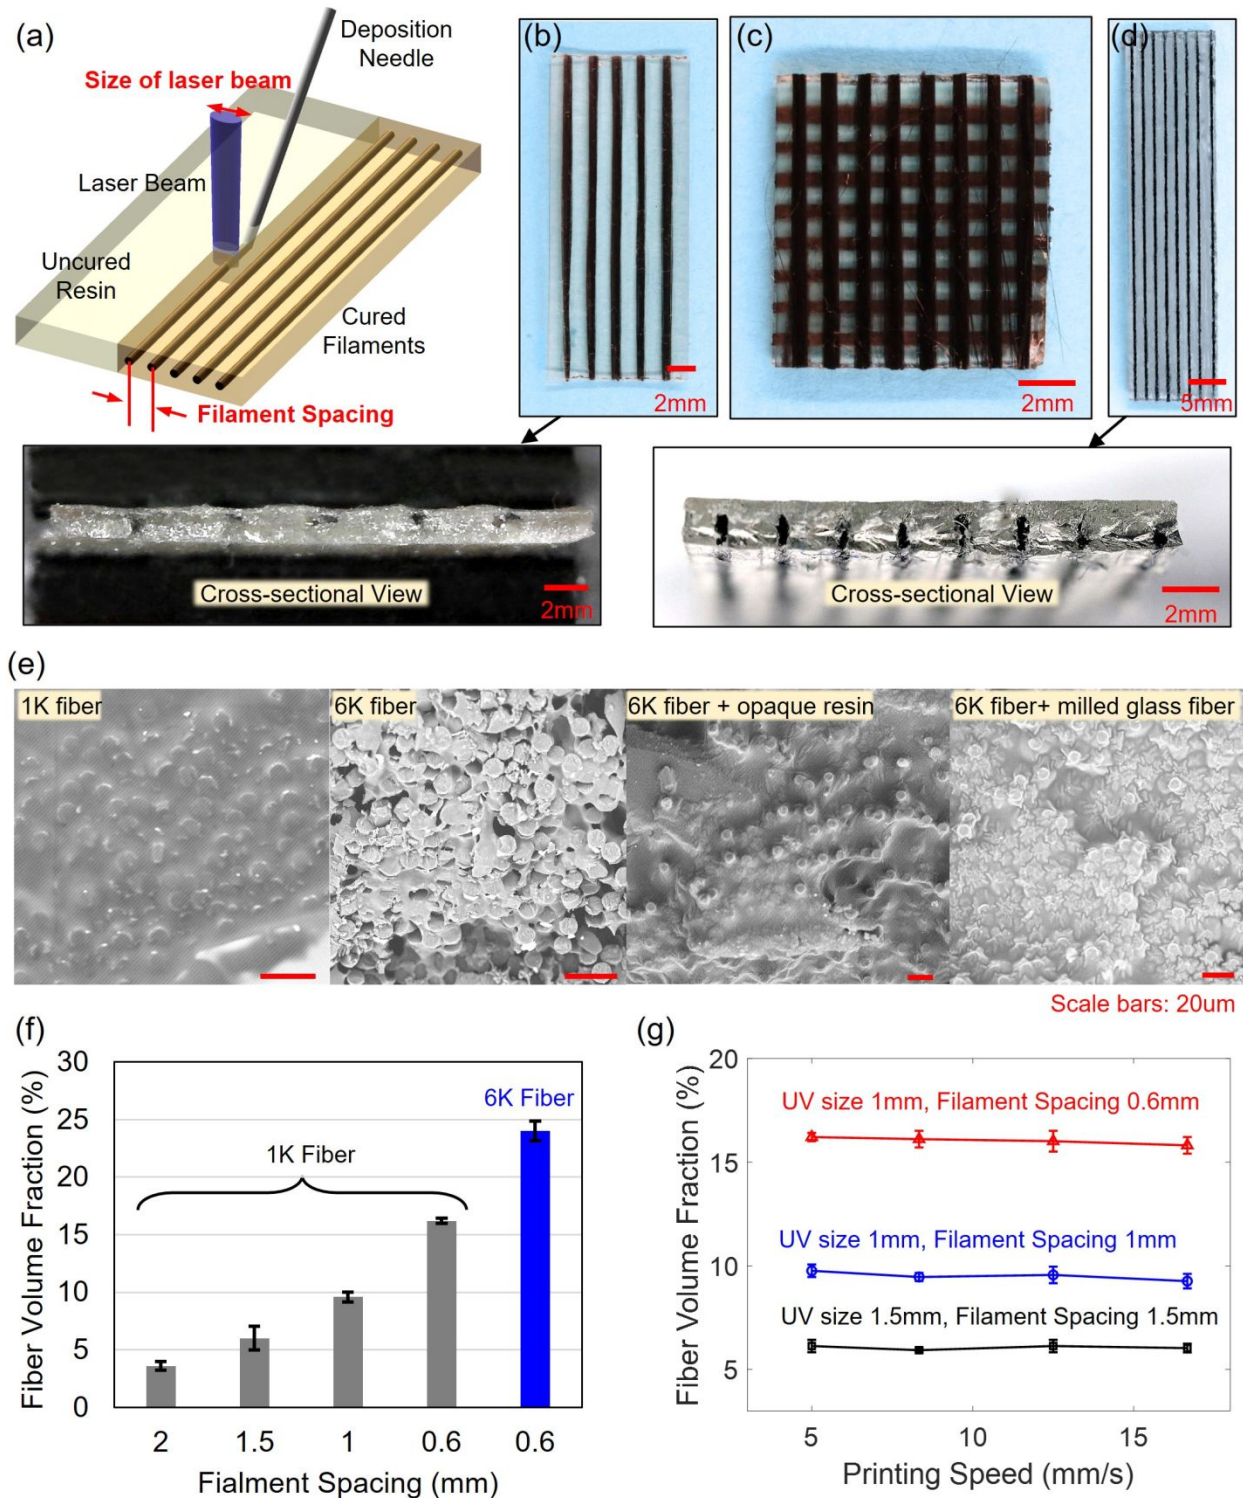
(a) A schematic view of the embedded composite printing highlighting the size of the applied laser beam and filament spacing. (b) A printed single-layer composite lamina with 3.6% carbon fiber and the sample cross-sectional view under microscope. (c) A two-layer $0^\circ/90^\circ$ symmetric composite laminate
